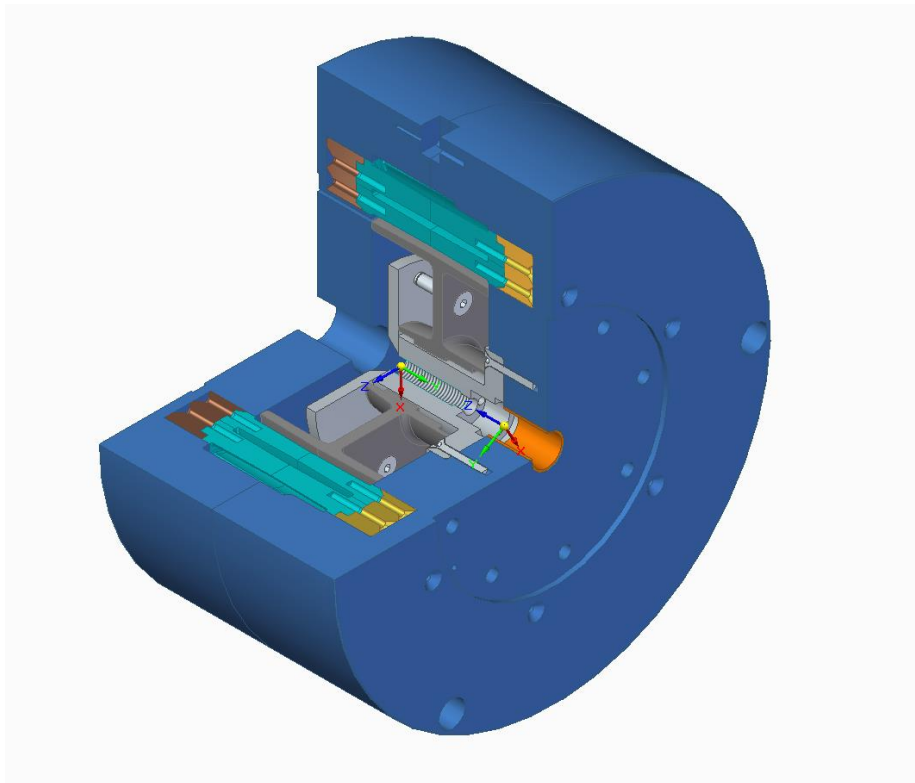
Back of the mould which bolts onto a shaft and motor to spin.
